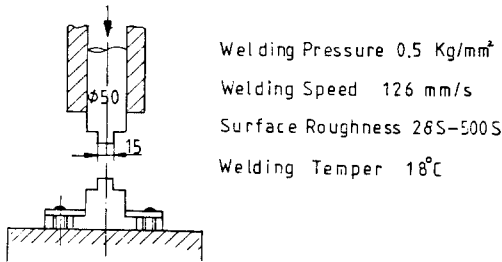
Welding Condition and Pressure Welding die form
